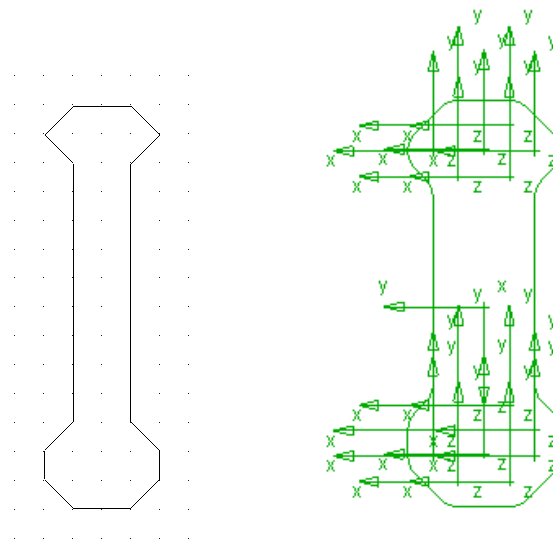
Adams/View Connecting Rod Sketch and Final Model
